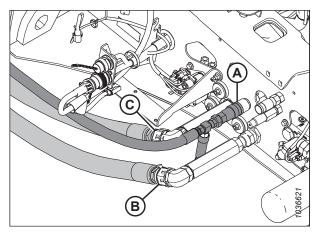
Header Drive Hydraulics – M1240, Rotary Disc Configuration with Hard-Plumbed Fittings
